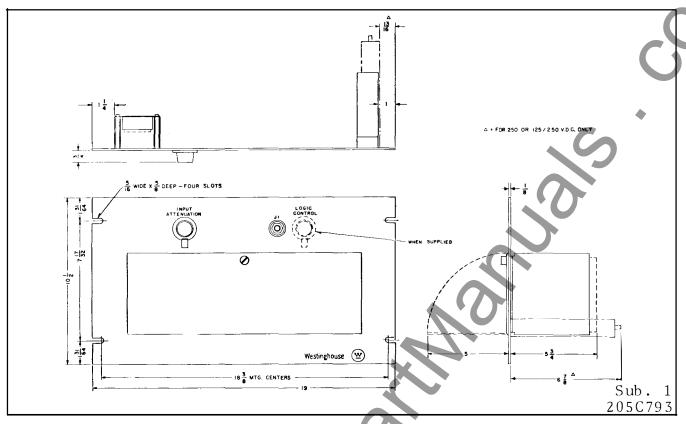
Outline and drilling plan for the type TCF receiver assembly.
